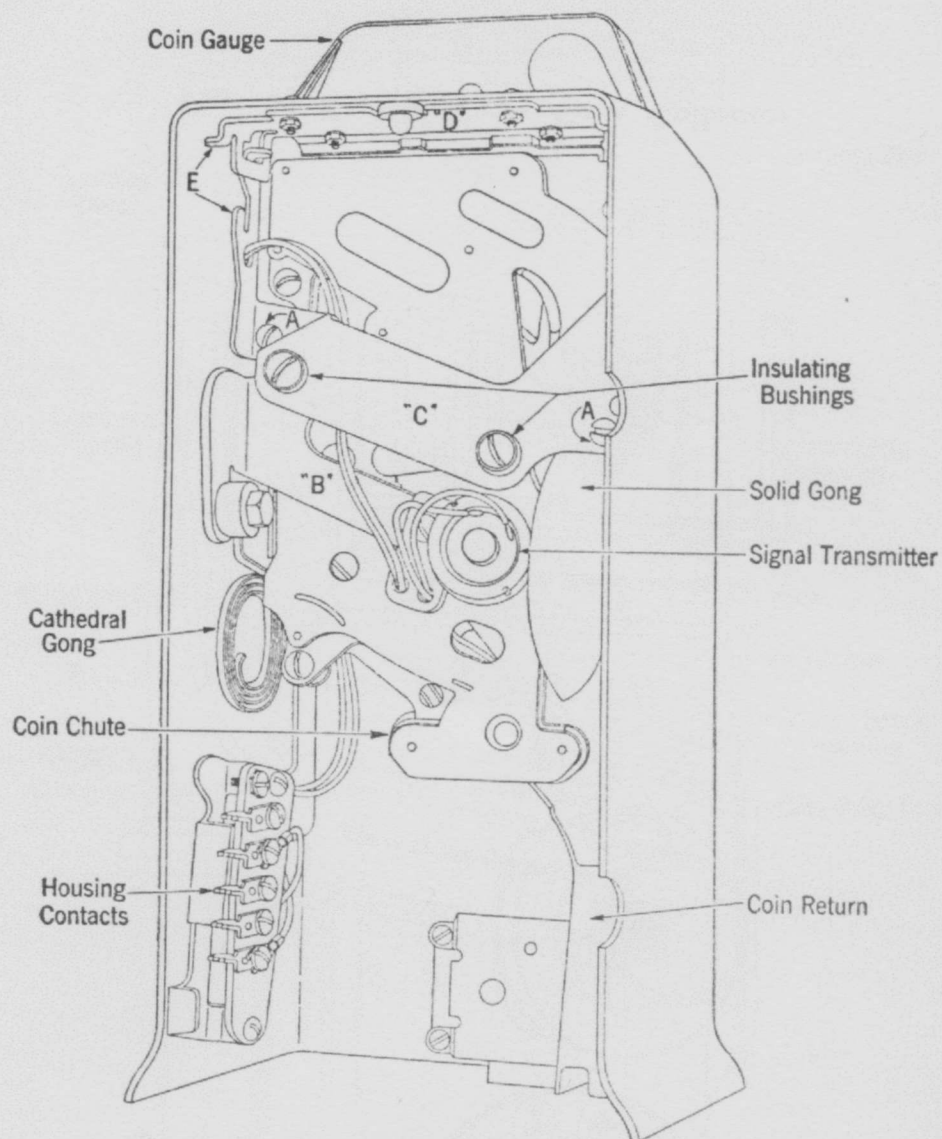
Hand Set Coin Collector—Interior of Upper Housing
